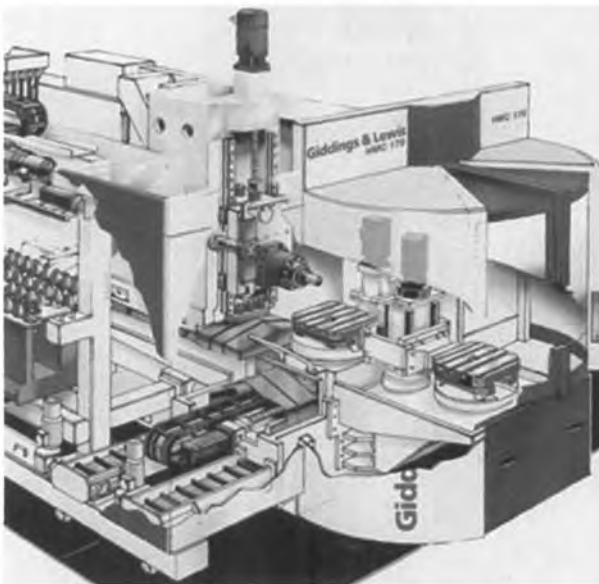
T A horizontal machining center. This CNC machine has a large-capacity tool changer and dual work tables so that one workpiece can be machined while another is unloaded or loaded. (Courtesy Giddings and Lewis Machine Tools.)
